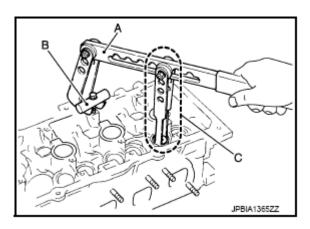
Compressing Valve Spring Courtesy of NISSAN NORTH AMERICA, INC.
